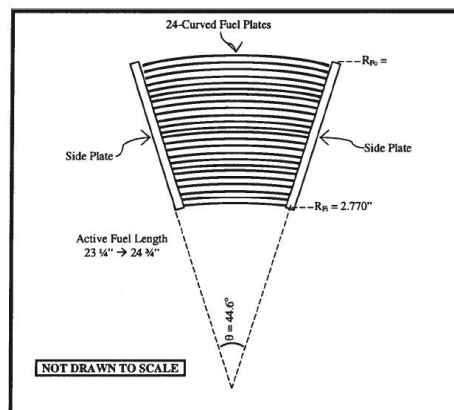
Top View Schematic of a MURR Fuel Assembly.
